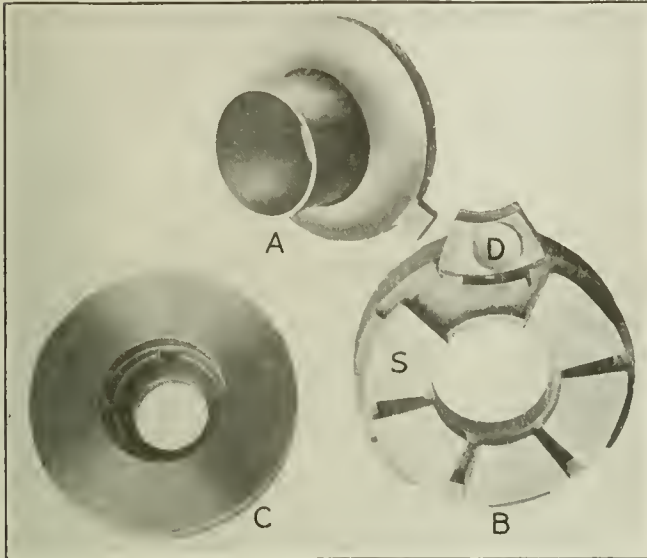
PARTS OF KINGSBURY THRUST BEARING
